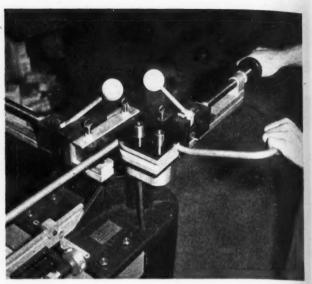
Bending Tubing on the "Bendmaster" Illustrated in Fig. 1
